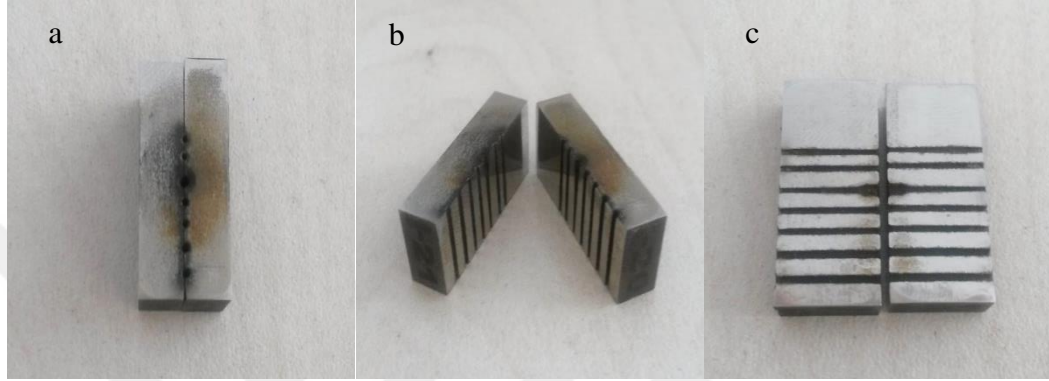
(a)Top view of workpiece, (b)Half-open view of workpiece and (c)Inside of workpiece
